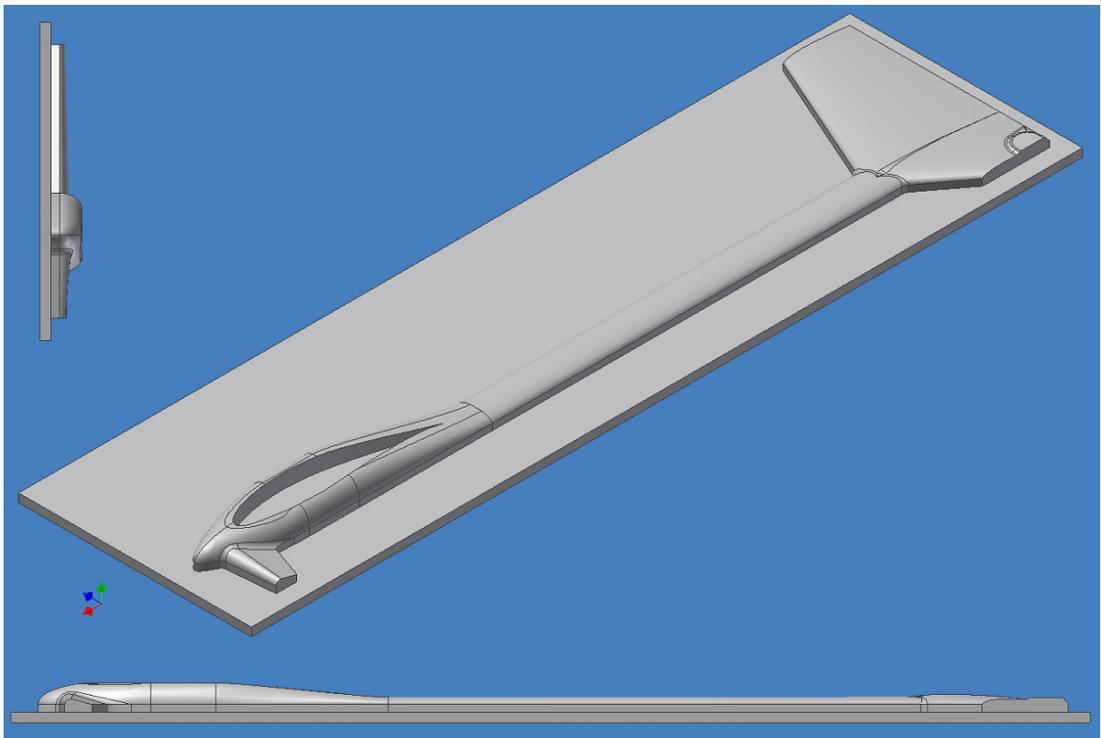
Boom Plug – left half: front, isometric & side views.
